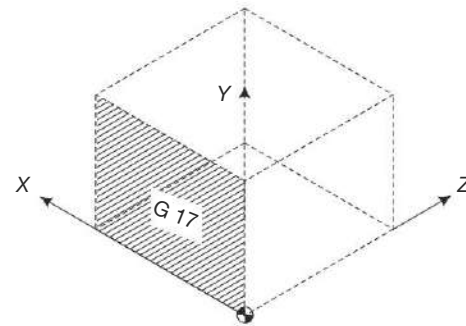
XY plane selection for horizontal-axis milling machines
